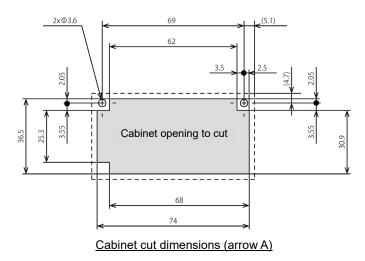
Fixing screw positions and the dimensions of the paneling to cut
